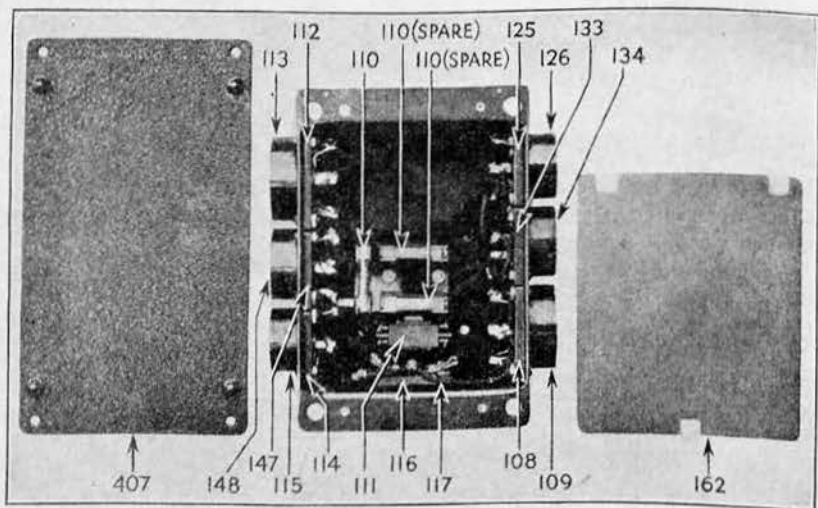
Junction box, type TM-AA-153, and mounting, type FT-101, bottom view.
